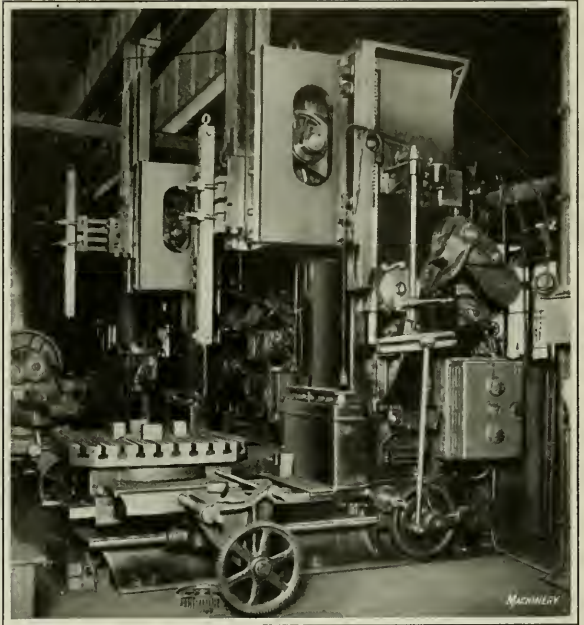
Slotter driven by 15-horsepower Adjustable-speed Reversing Planer Motor
